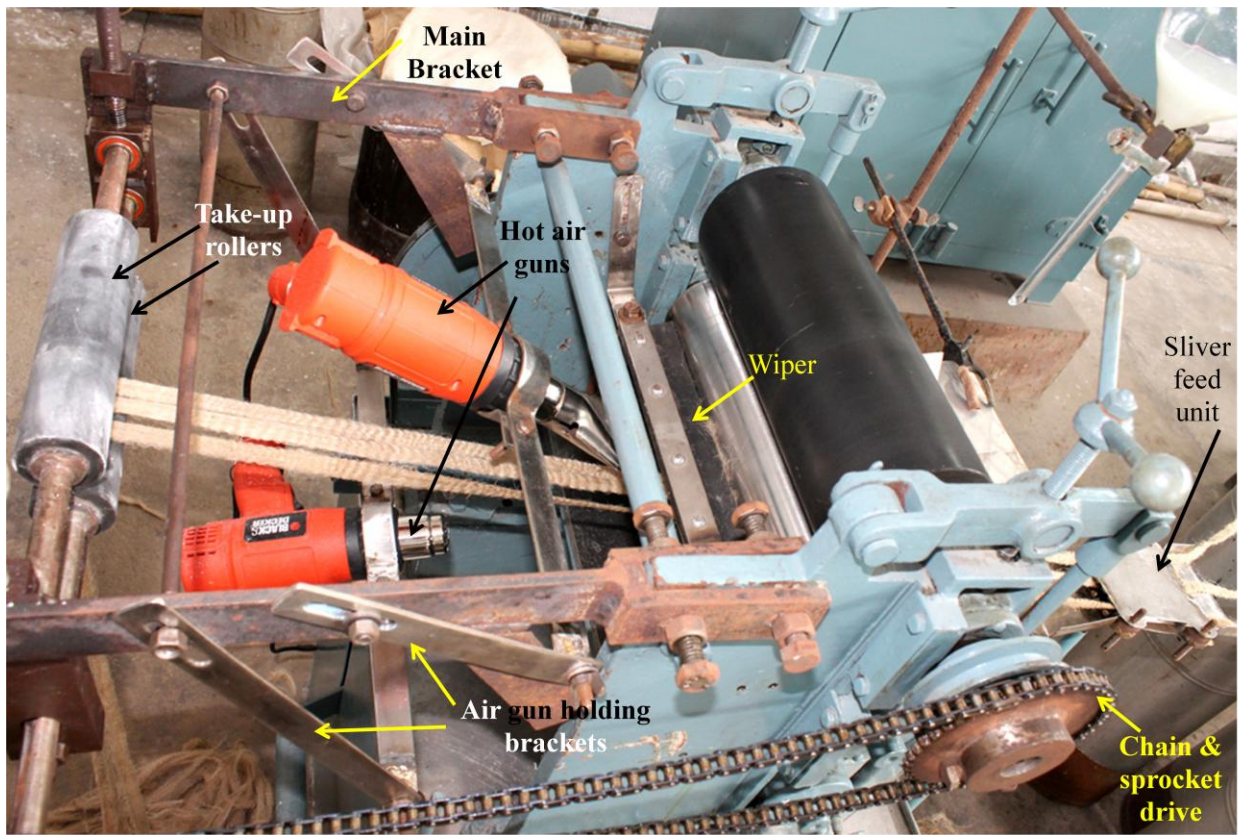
Assembled view of the newly fabricated parts mounted on the padding mangle from top
